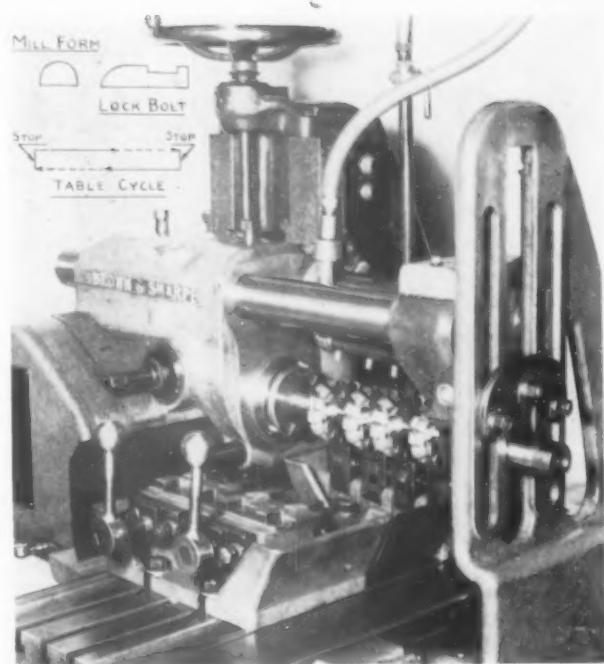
An application of right hand and left hand fixtures, one working while the other is loading.
